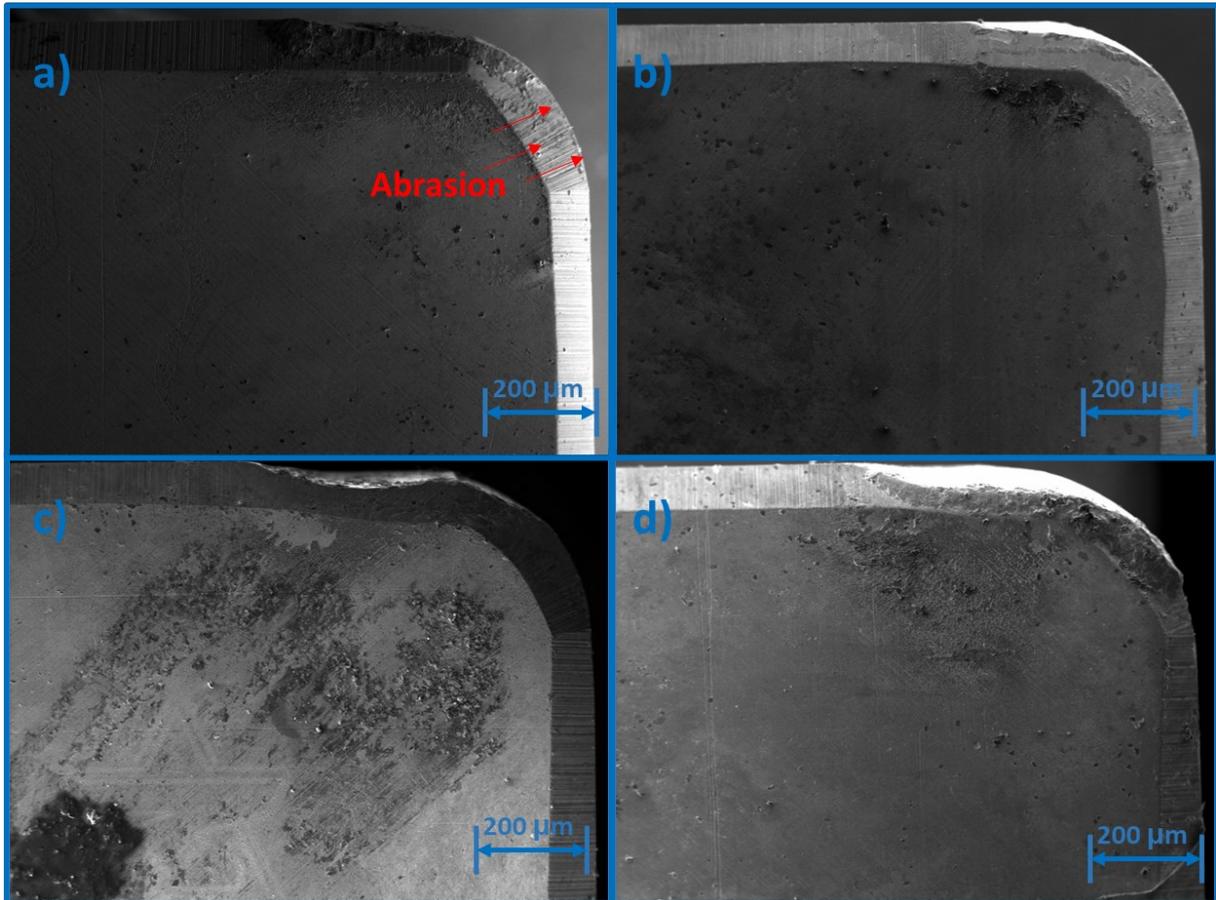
Scanning electron microscopy of the rake face of the tools. a) internally cooled tool $V_c = 80$ m/min; b) Common insert (Dry) = 80 m/min; c) internally cooled tool $V_c = 125$ m/min; d) Common insert (Dry) = 125 m/min;
